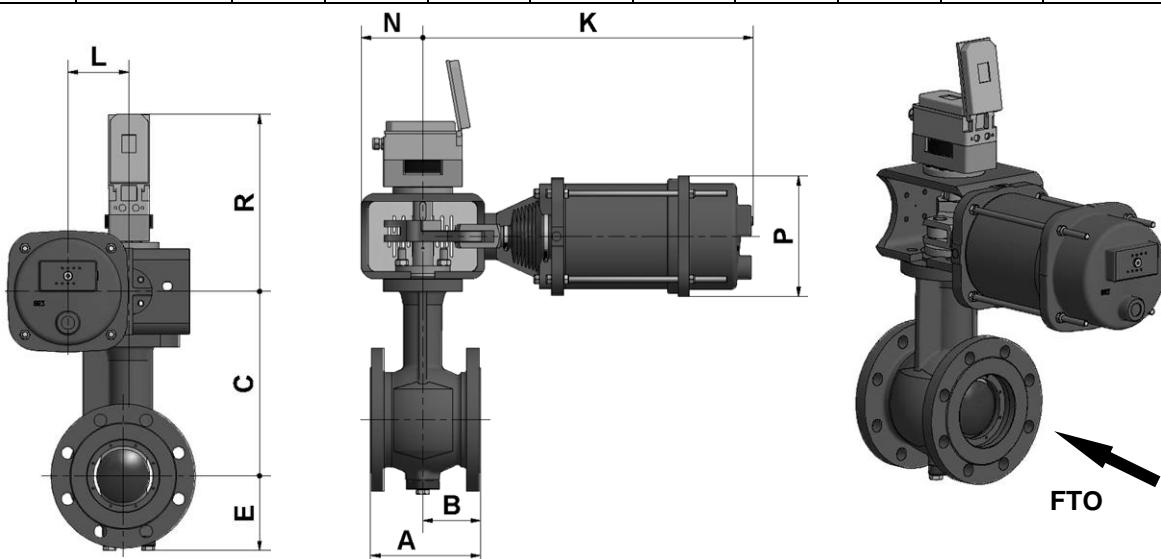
Dimensions - Control valve Type 82.7-02/AT · Assembly position A/C · FO/FC
